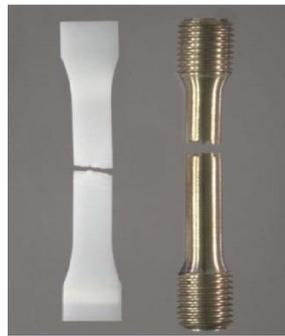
The figure shows typical tensile testing specimens. They have a thinner gage length between two gripping ends that are held by the testing machine. (Materials Evaluation and Engineering, Inc, 2009)
